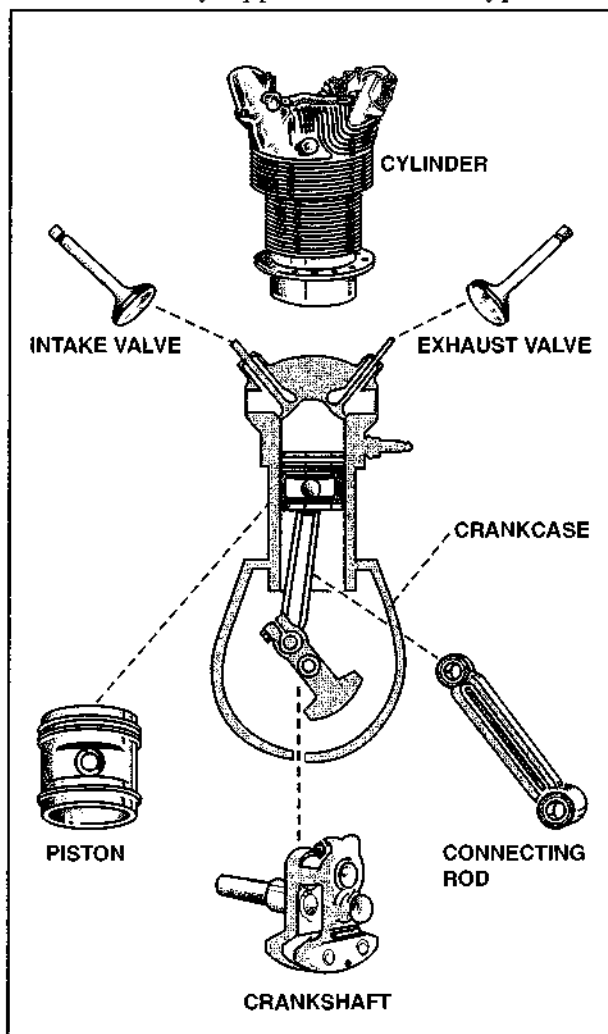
In a basic reciprocating engine, the cylinder forms a chamber where the fuel/air mixture is compressed and burned. The piston compresses the fuel mixture and transmits power to the crankshaft through the connecting rods. The intake valve allows the fuel/air mixture into the cylinder while the exhaust valve lets the exhaust gases out.
